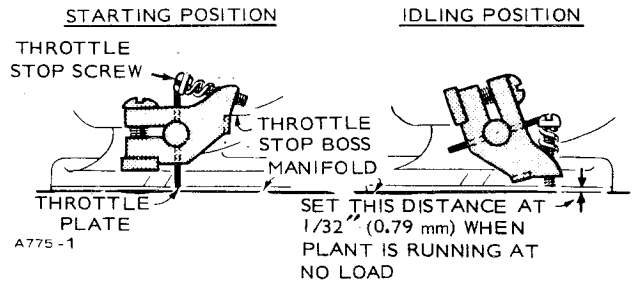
THROTTLE STOP SCREW ADJUSTMENTS
